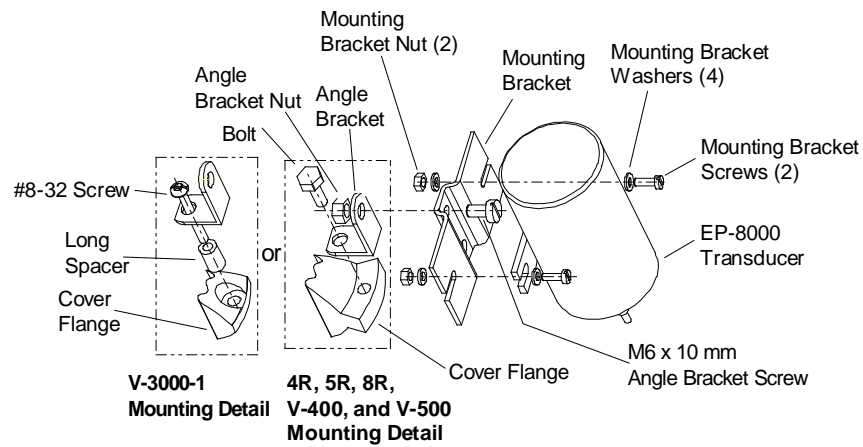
Mounting Detail for 4R, 5R, 8R, V-400, V-500, or V-3000-1 Pneumatic Actuators
